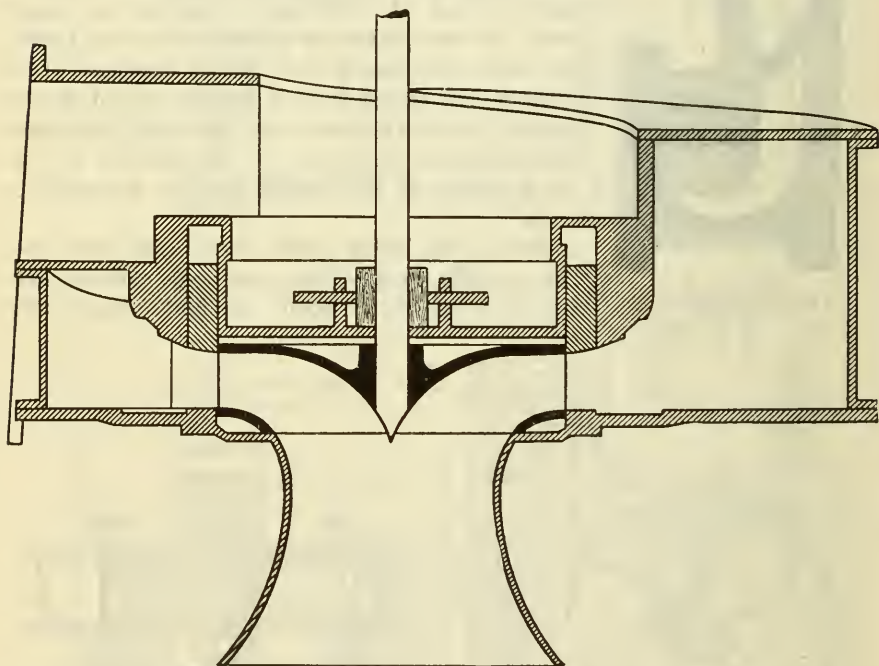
SCROLL WHEEL BY BOYDEN, 1854.
